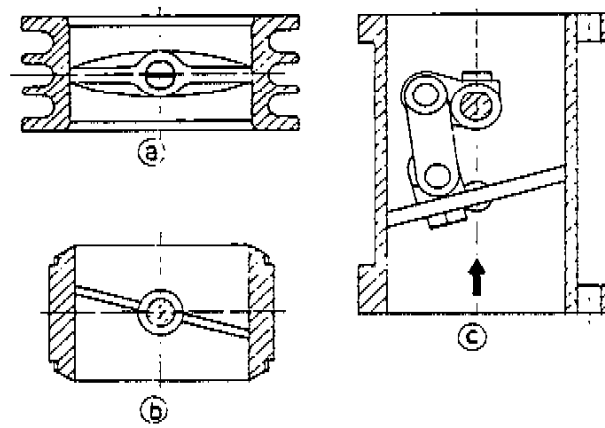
Examples of Exhaust Brake Types [4.7].
